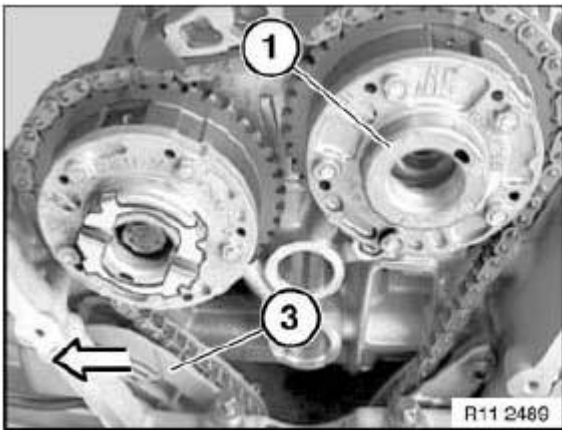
Pressing Tensioner Rail Back And Inlet Adjustment Unit
